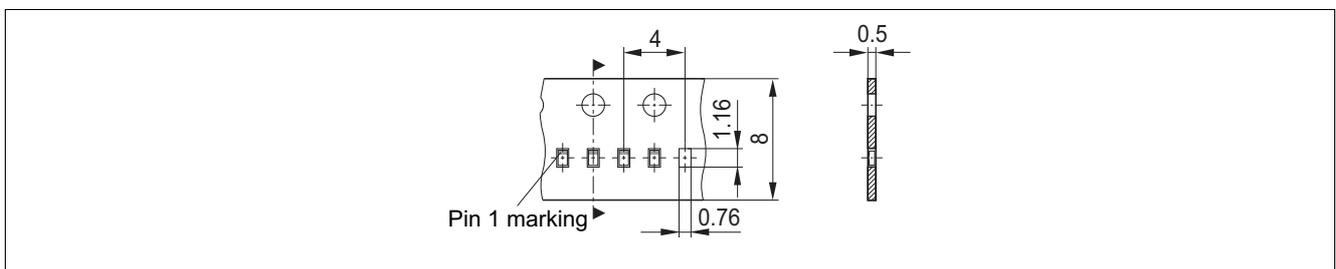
TSLP-2-17 Packing (dimension in mm)
